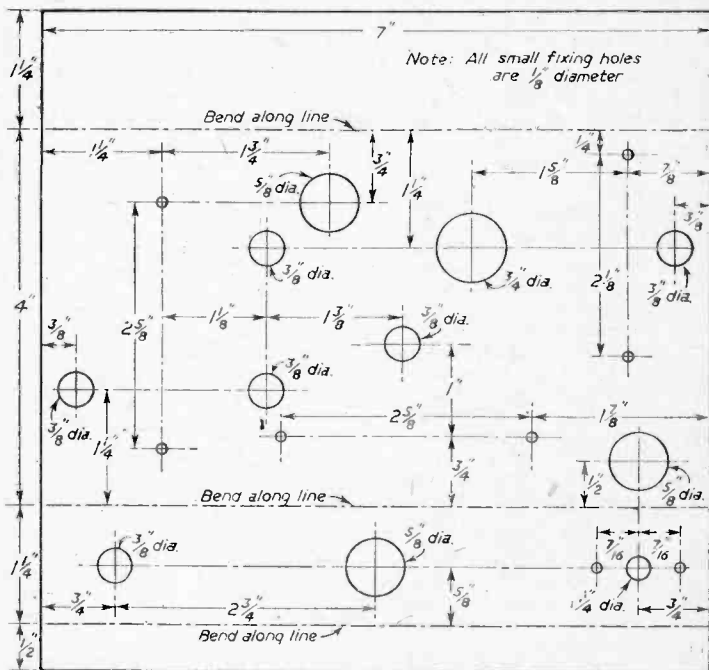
Chassis drilling and bending diagram for Fig. 36. Fig. 37 was the chassis data for Fig. 39.
